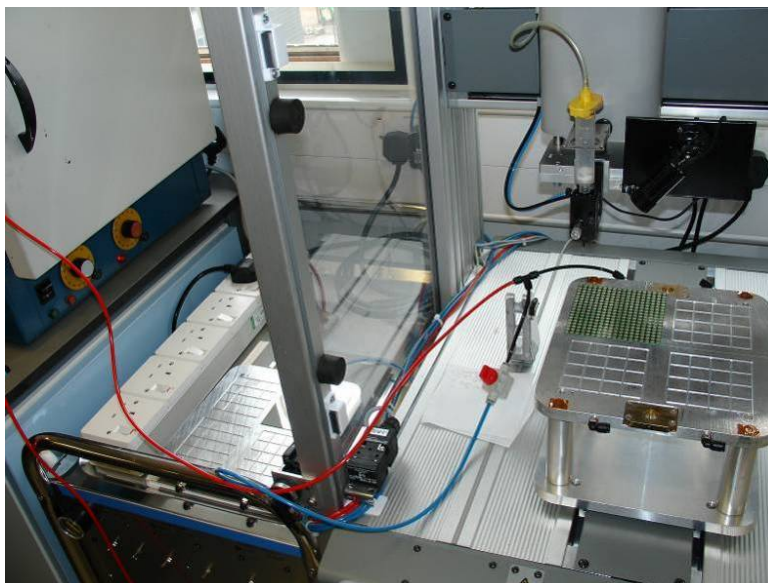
Showing a test board mounted on the vacuum jig under the dispenser head of the robot. Vacuum trolley and controls are also visible. The curing oven is to the left of the picture
